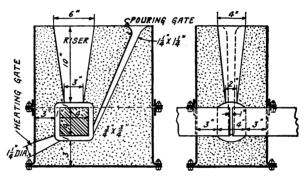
Section of Typical Thermit Mold Showing Riser, Pouring Gate, and Heating Gate Courtesy of Goldschmidt Thermit Company
